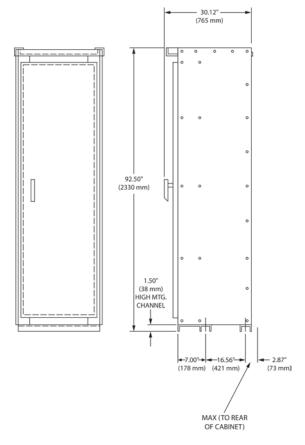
Mounting Dimensions for NEMA 3R and 4 Section [90 in. (2866 mm) high]
